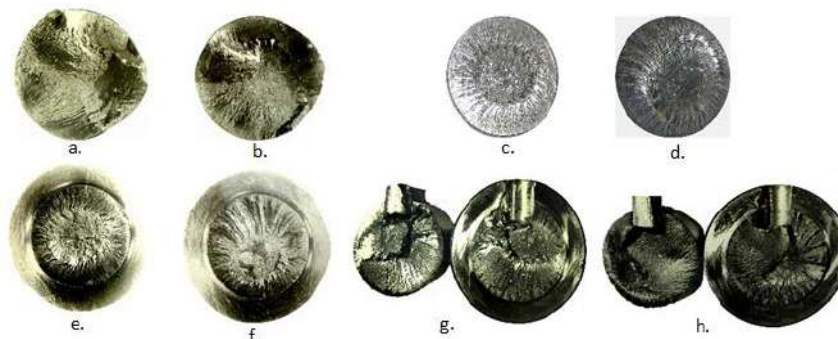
Heat shrinkage shafts and shaft joints (a, e, c, g) and low (b, f, d, h): a, b – glossy; e, f – with a rounding; c, d – with V-shaped knuckles; g and h – shontoons
